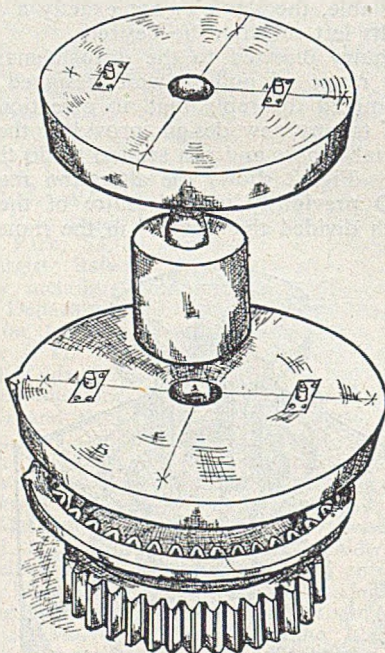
"Exploded" View of the Re-designed, Winding-drum Pattern, a Stripping Plate forming the Teeth.
